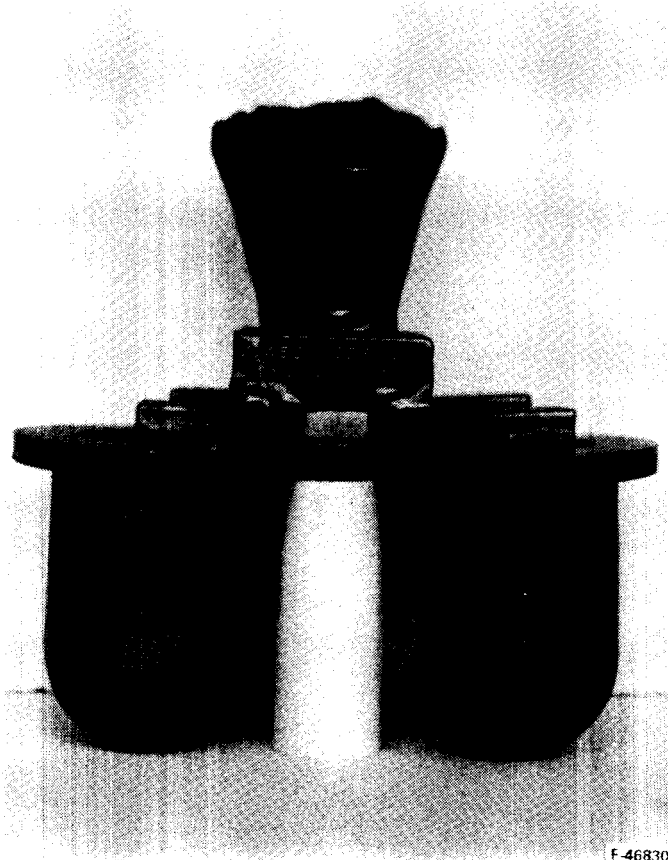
Sandblasted Housing Castings with Risers and Gating Attached. Casting Poured into an Investment Shell Mold.
